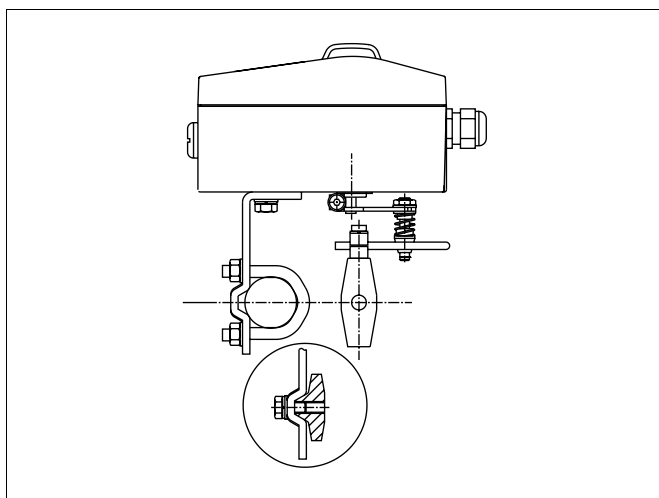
Mounting to linear actuators to DIN/IEC 534
